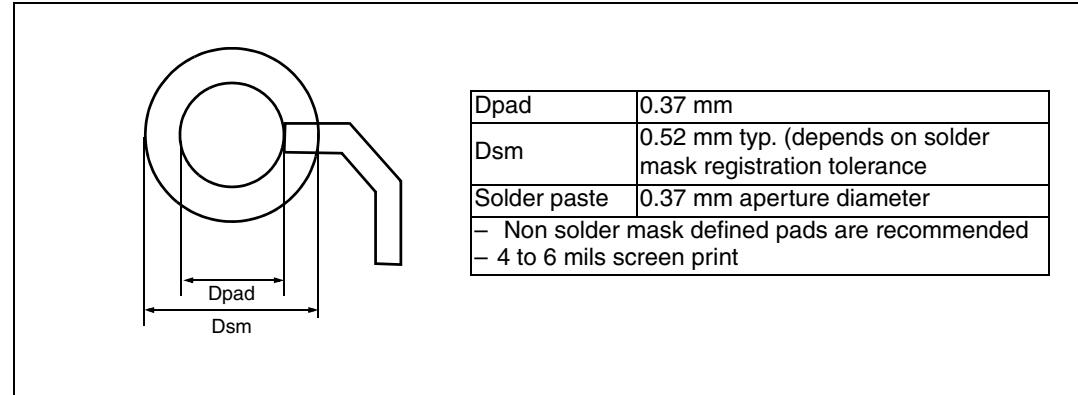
Recommended PCB design rules (0.80/0.75mm pitch BGA)
